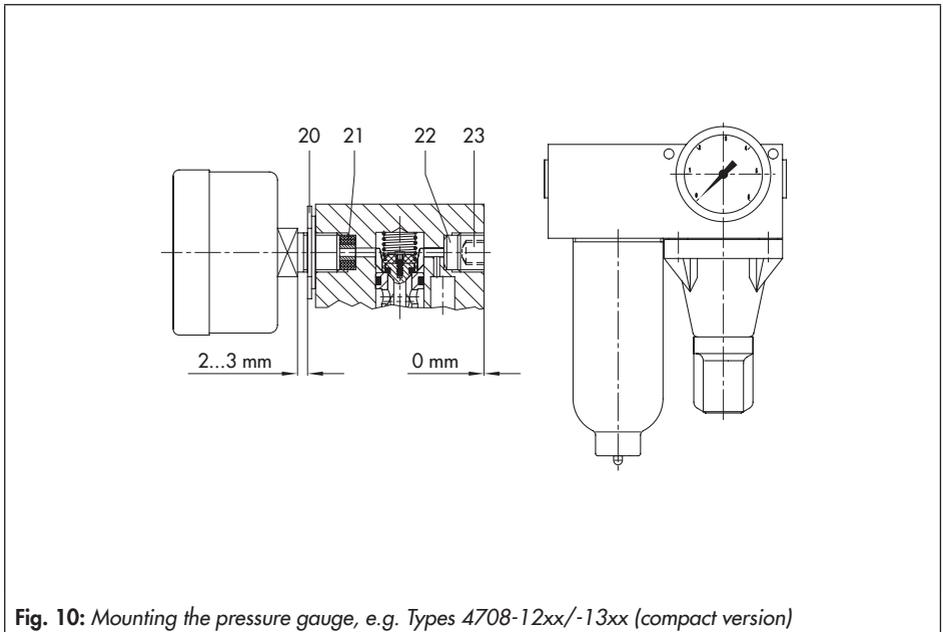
Mounting the pressure gauge, e.g. Types 4708-12xx/-13xx (compact version)
